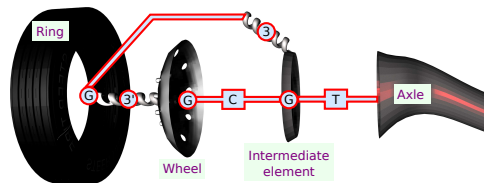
Exploded view of the L5 link between the steering wheels and their axle.
